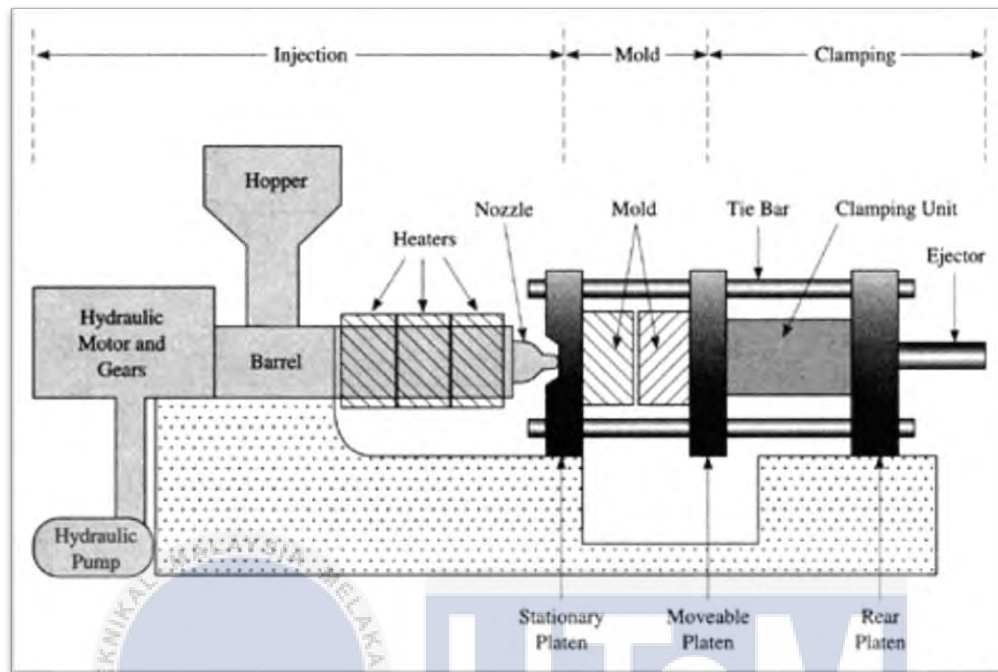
Single Stage Screw Machine (*deseng.ryerson.ca*)
